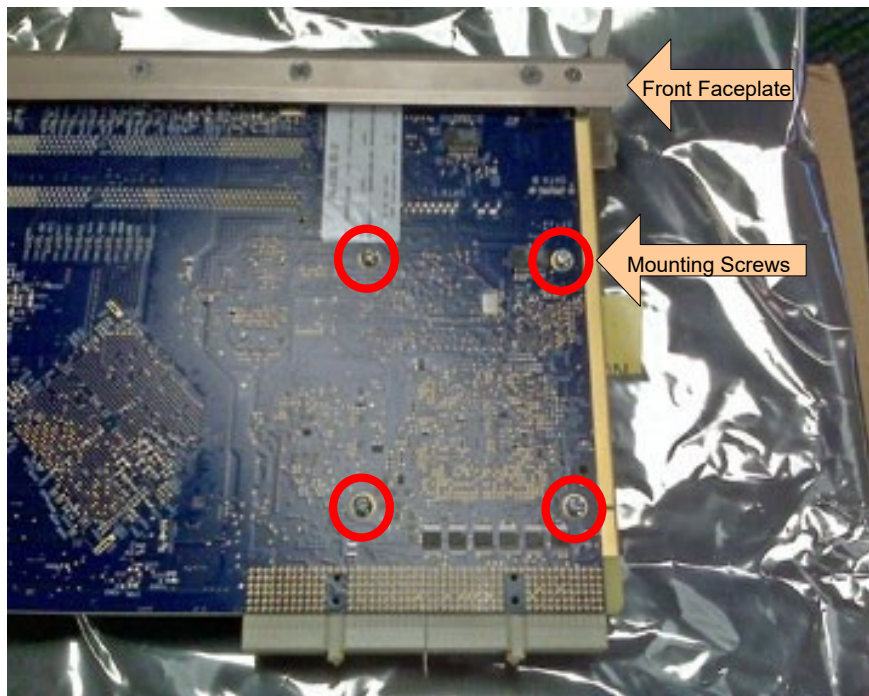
Location of Hard Disk Drive Mounting Screws
